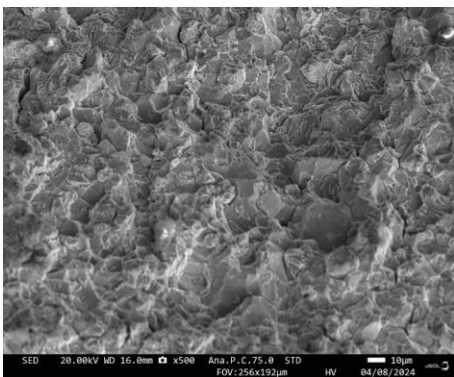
Fracture surface bolt C, near center, ductile.
